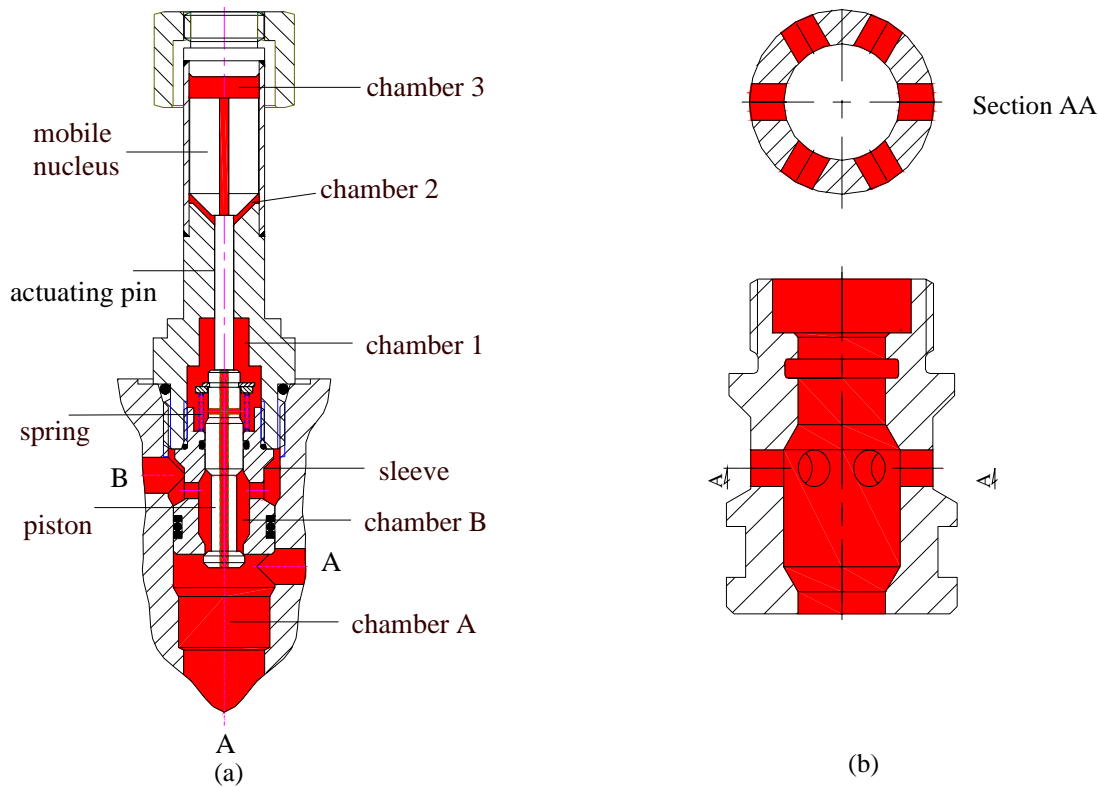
a) Scheme of the cartridge valve; b) Holes symmetrically distributed on the valve sleeve
